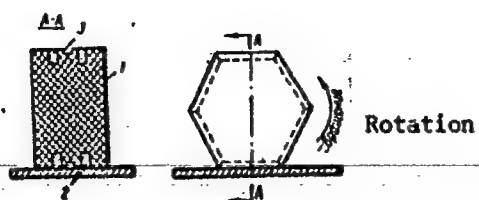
1--casing; 2--metal electrodes; 3--recess
